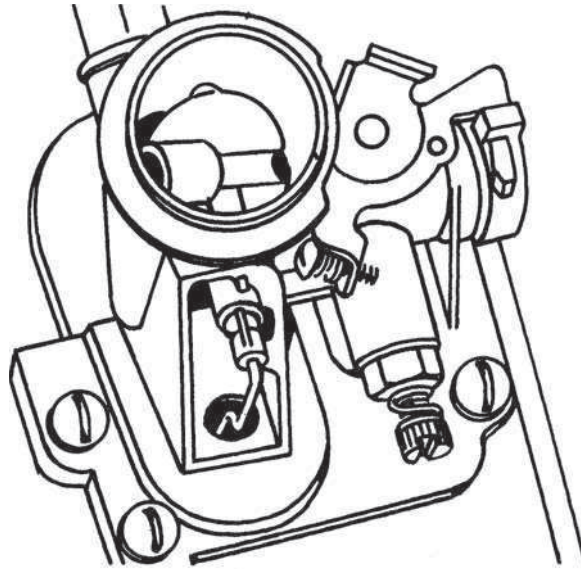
Complete the assembly while holding the choke closed. Briggs & Stratton Corp.
